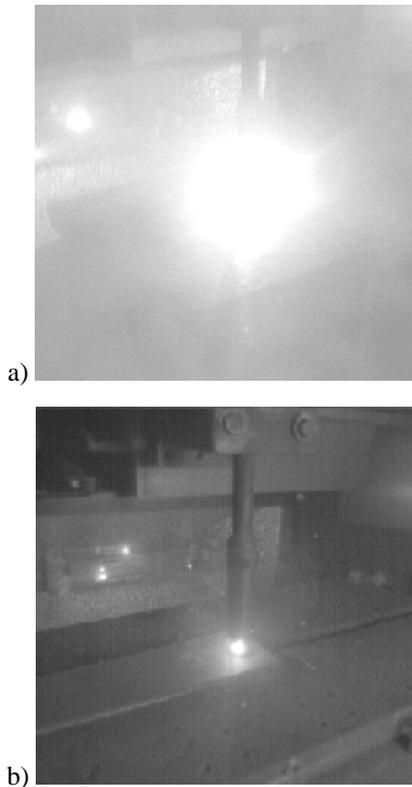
Welding scene recorded with (a) CCD camera (b) HDRC camera
